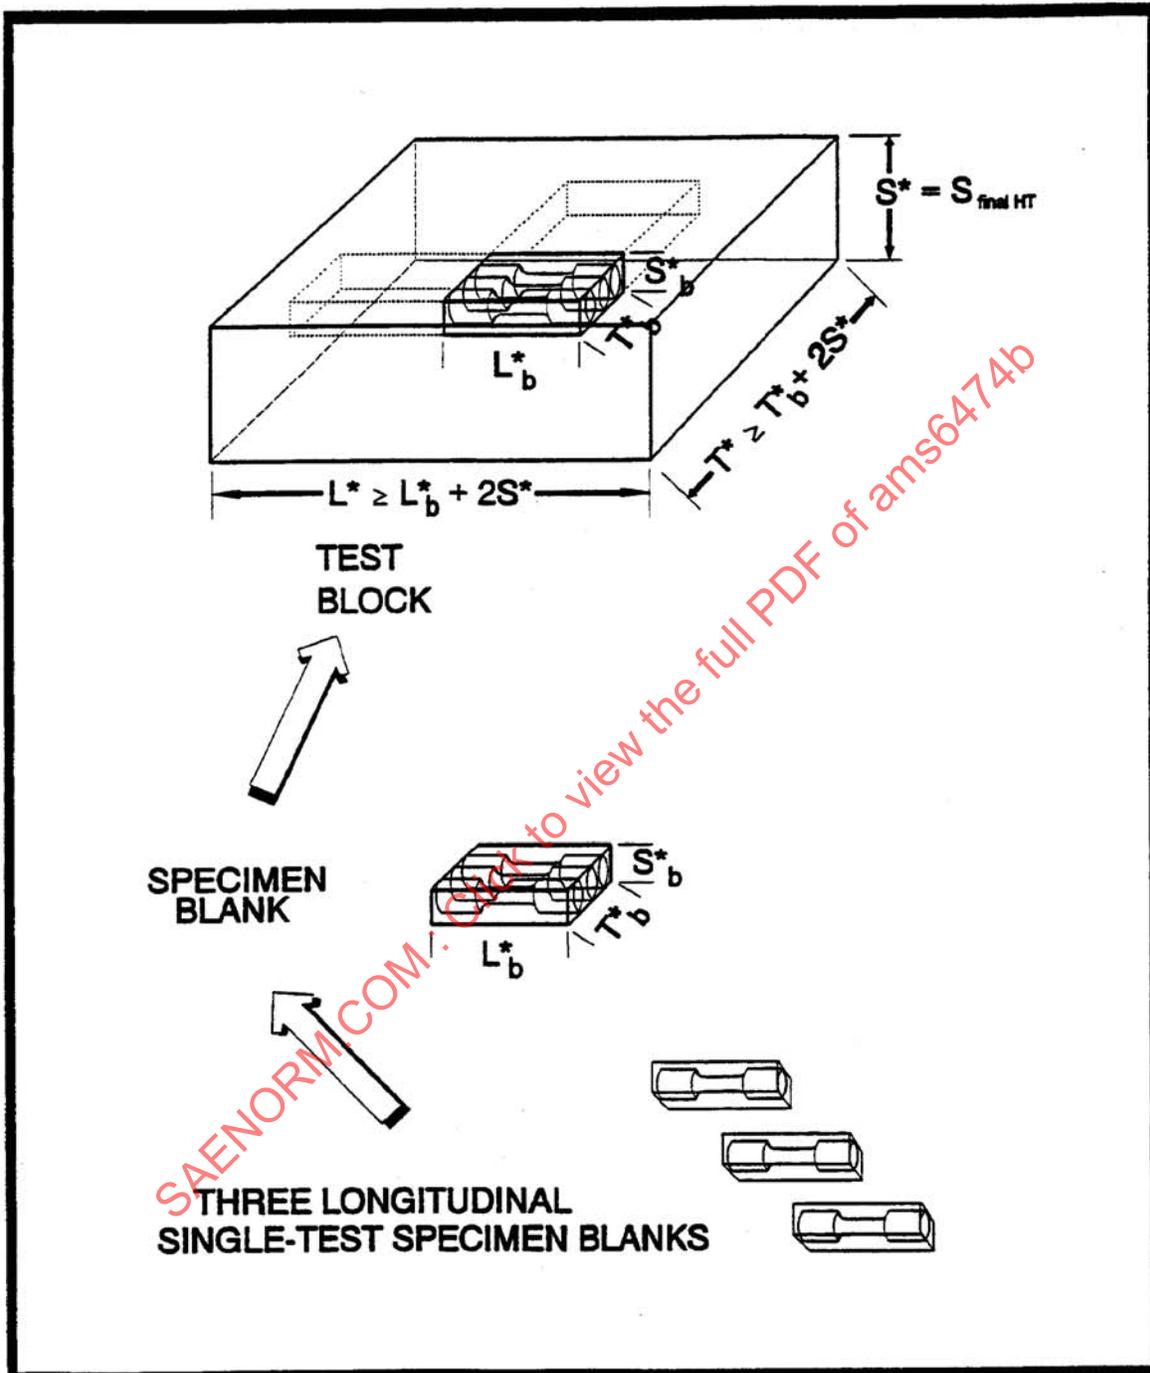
LONGITUDINAL SPECIMEN BLANK DESIGN AND TEST BLOCK DESIGN
